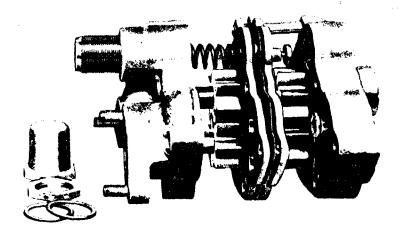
Duplex Pressure and Scavenge Oil Pump for W670 Engine
